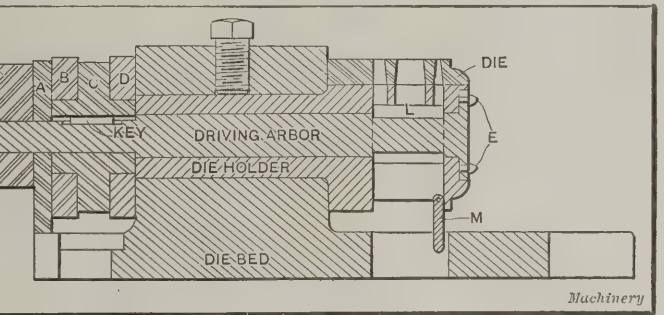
Section of Die Bed, Holder and Arbor for Perforating Shell in Fig. 7
